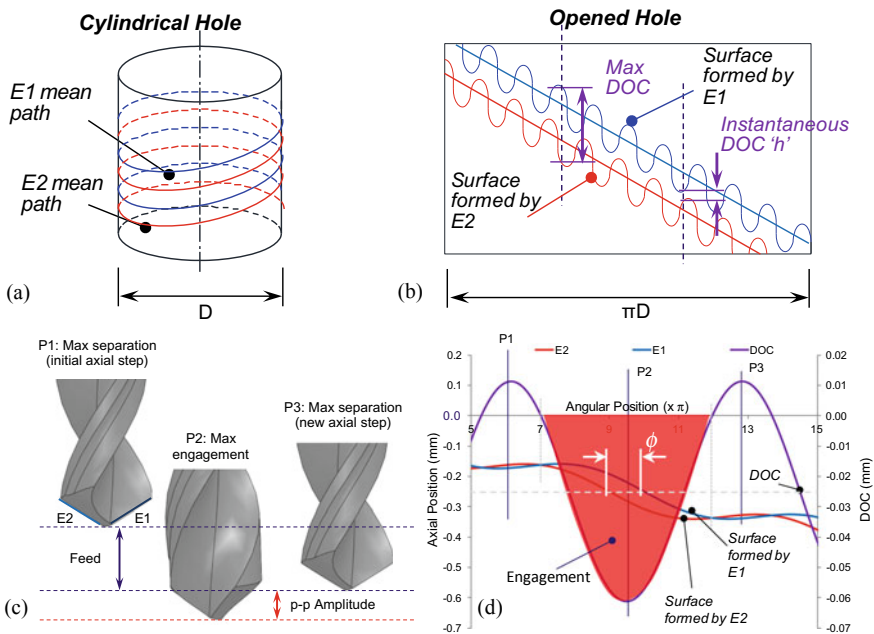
a Mean paths of the tool cutting edges in the cylindrical hole, b the vibratory path of the tool cutting edges represented in the opened hole. c Positions of the tool edge through the VAD engagement and the separation cycles d Axial and angular positions of the machined surfaces formed by the cutting edges during VAD, and the resultant DOC [20]
